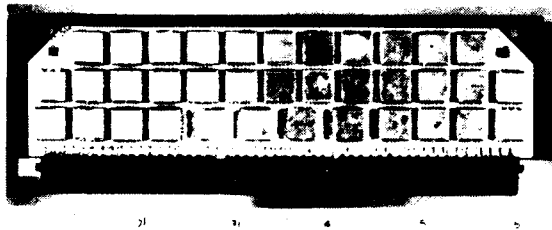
70-Chip Double-sided Hybrid in Improved Standard Electronic Module (ISEM) Format.
